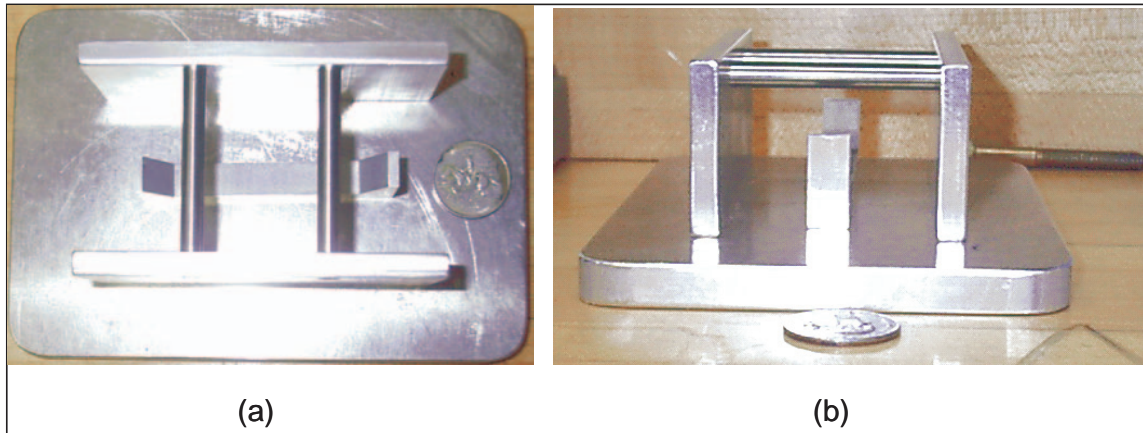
(a) Top view of the four-point strain fixture. (b) Sideview of the four-point strain fixture.
